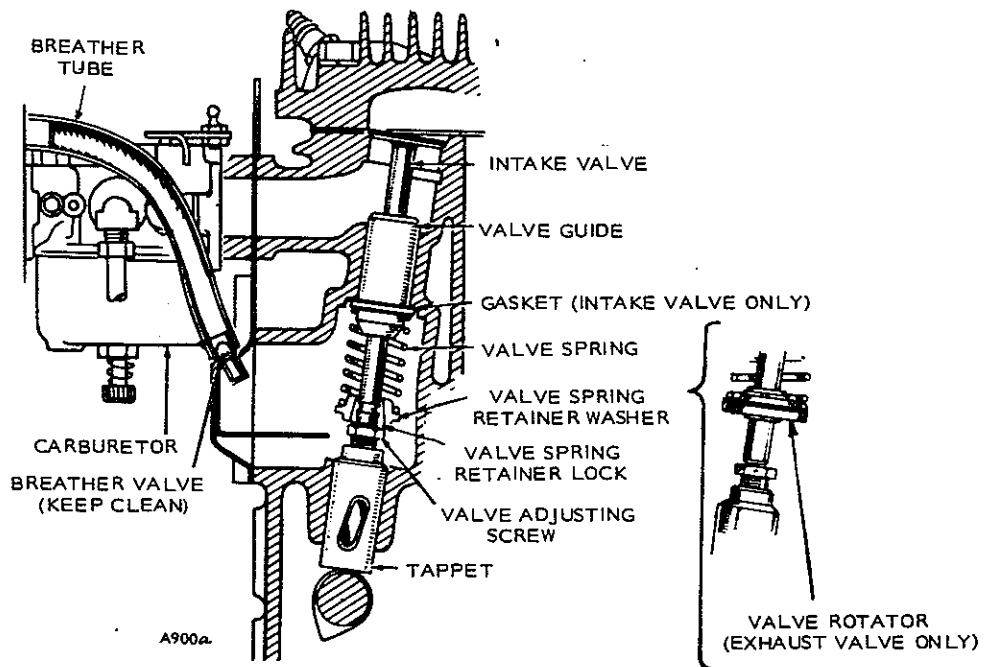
VALVE ASSEMBLY — ALL SINGLE CYLINDER ENGINES
